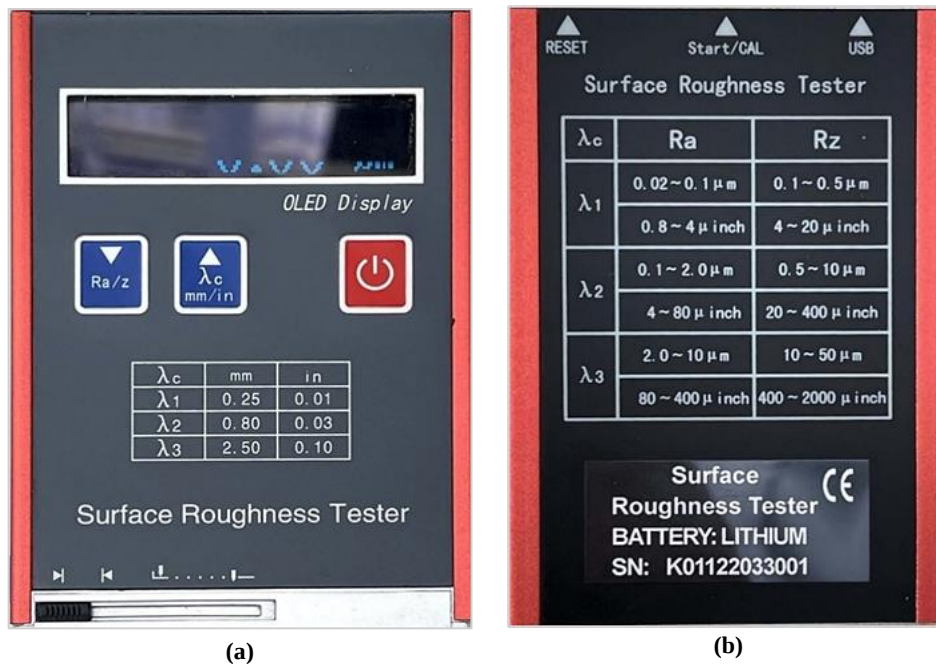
Surface roughness tester (a) front and (b) back of the tester
